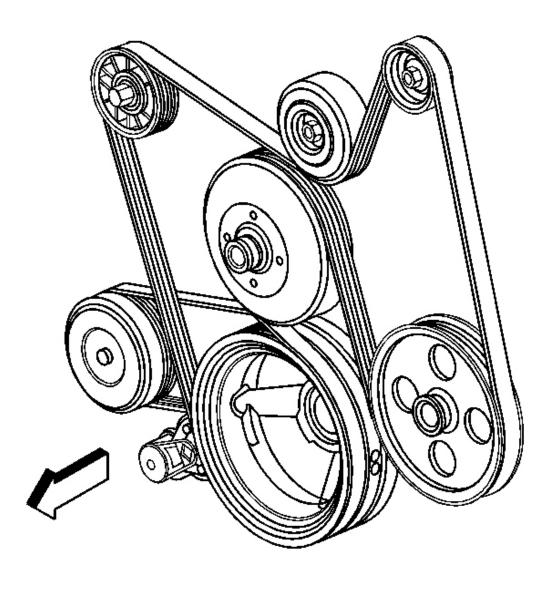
View Of Accessory Drive Belt & Pulley Courtesy of GENERAL MOTORS CORP.
